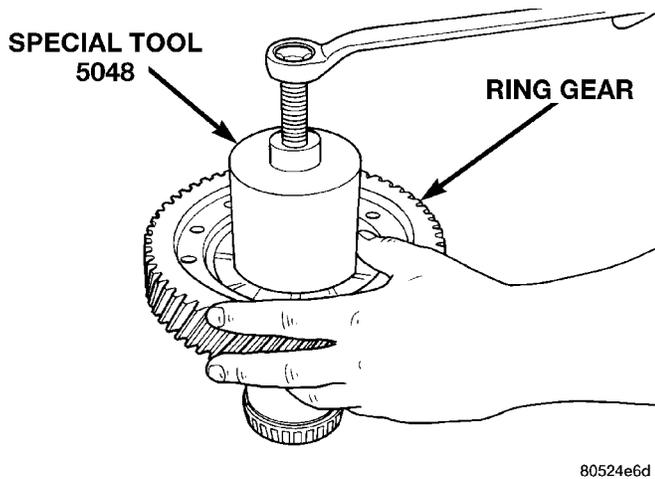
Position Button and Collets Onto Differential and Bearing (Ring Gear Side)
